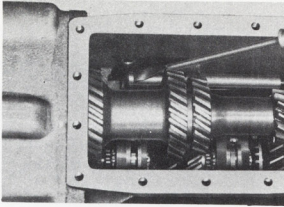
Sliding Fifth & Reverse Fork Shaft V1281
